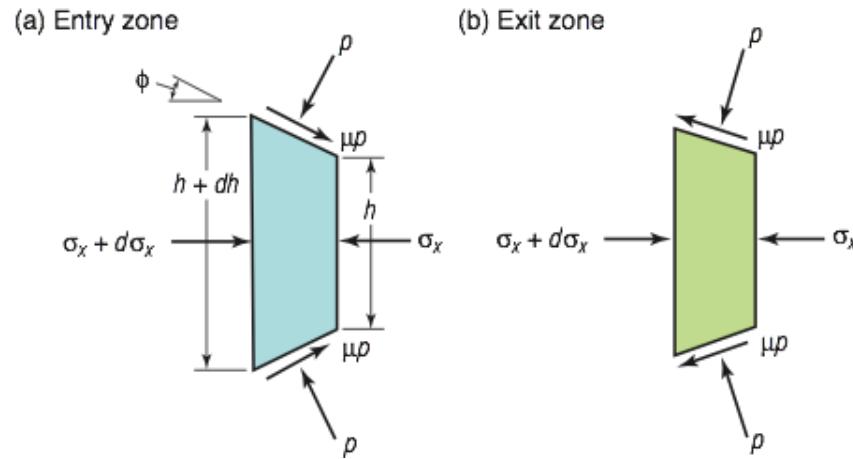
Stresses acting on an element in rolling: (a) entry zone and (b) exit zone.
